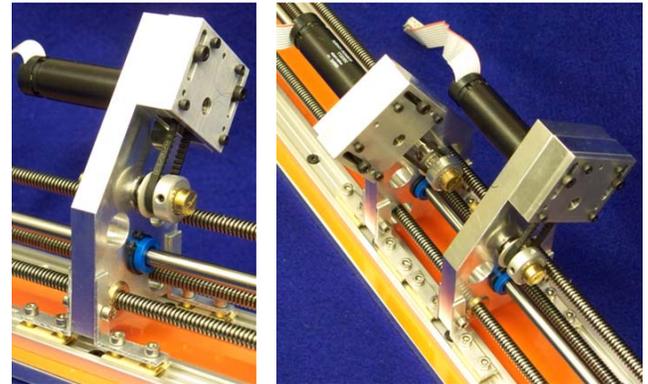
(Left) a close up of a single carriage showing the attached motor and belt drive which turns a brass collet that grips a tube. Also pictured are the central support shaft and the linear bearing that slides on it and the two linear slides that support the bottom corners of the carriage. (Right) the motors of successive carriages are offset and can thus pass by one another permitting carriages to stack tightly in the axial direction.
